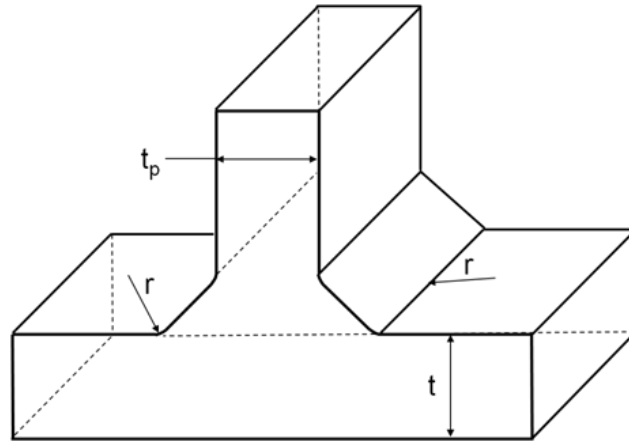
T-joint with the base plate thickness 't' and weld toe radius 'r'
